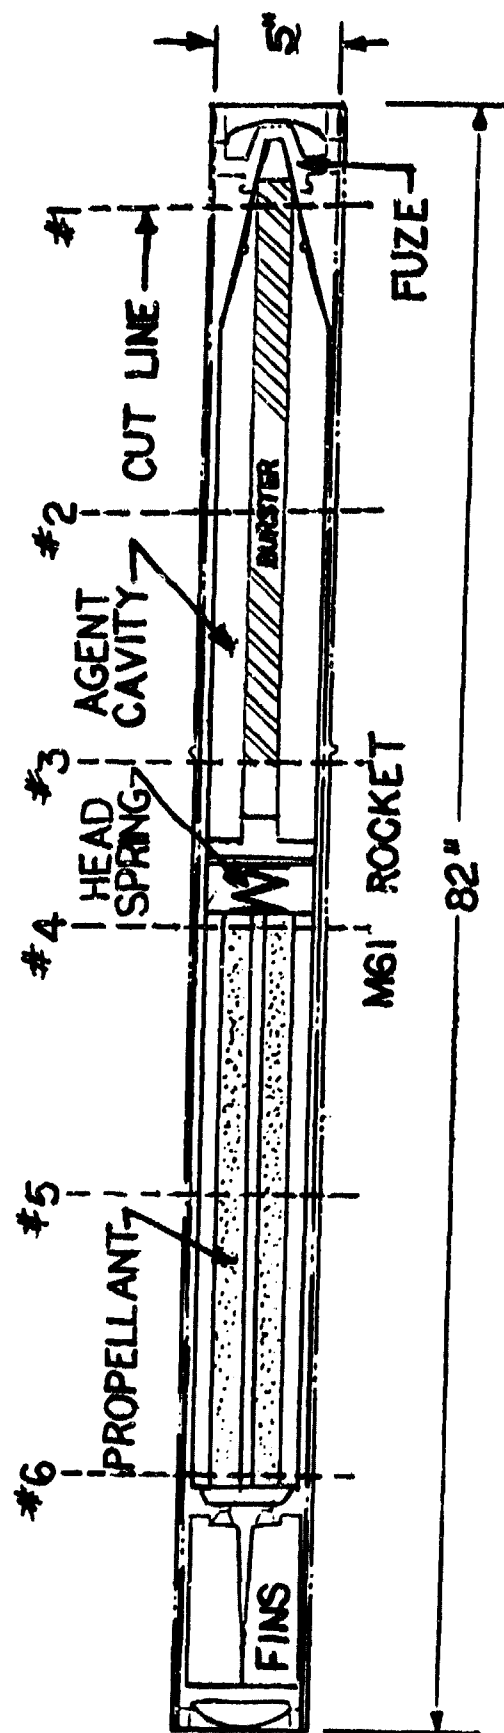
M61 ROCKET, SHEARING LOCATIONS
